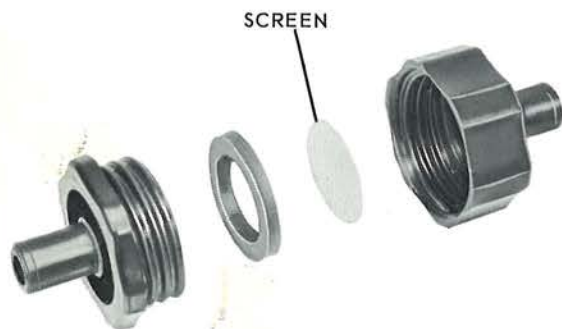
FIXER STRAINER ASSEMBLY (EXPLODED VIEW)
